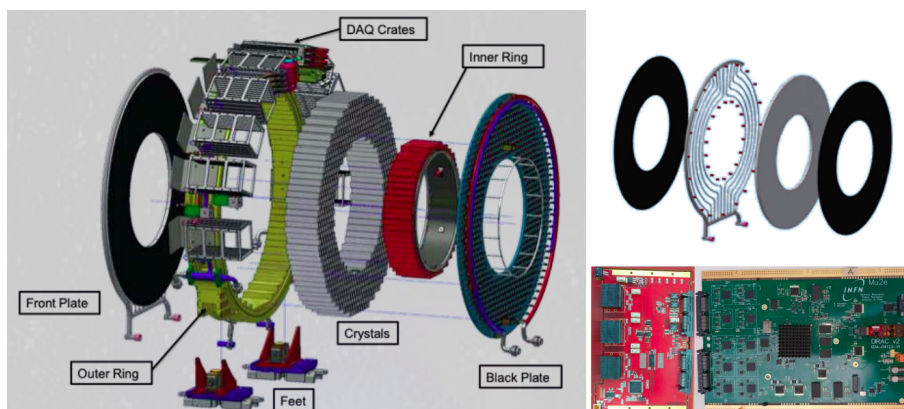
Left: the breakout of calorimeter mechanical components. Top right: the breakdown of front panel plate. Bottom right: the Mezzanine and DiRAC boards [70].
